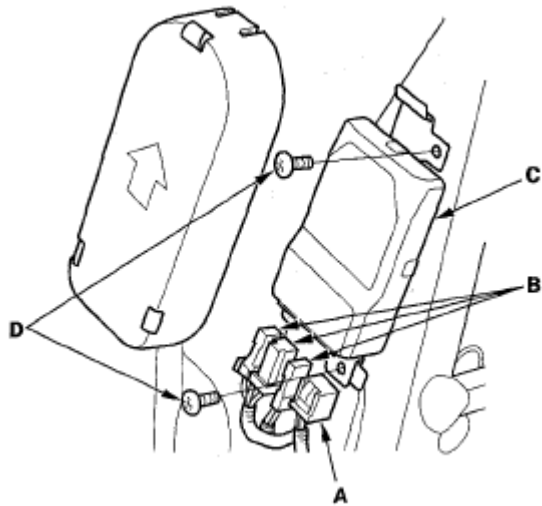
Identifying ODS Unit 18P Connector, Sensor Connectors And ODS Unit
